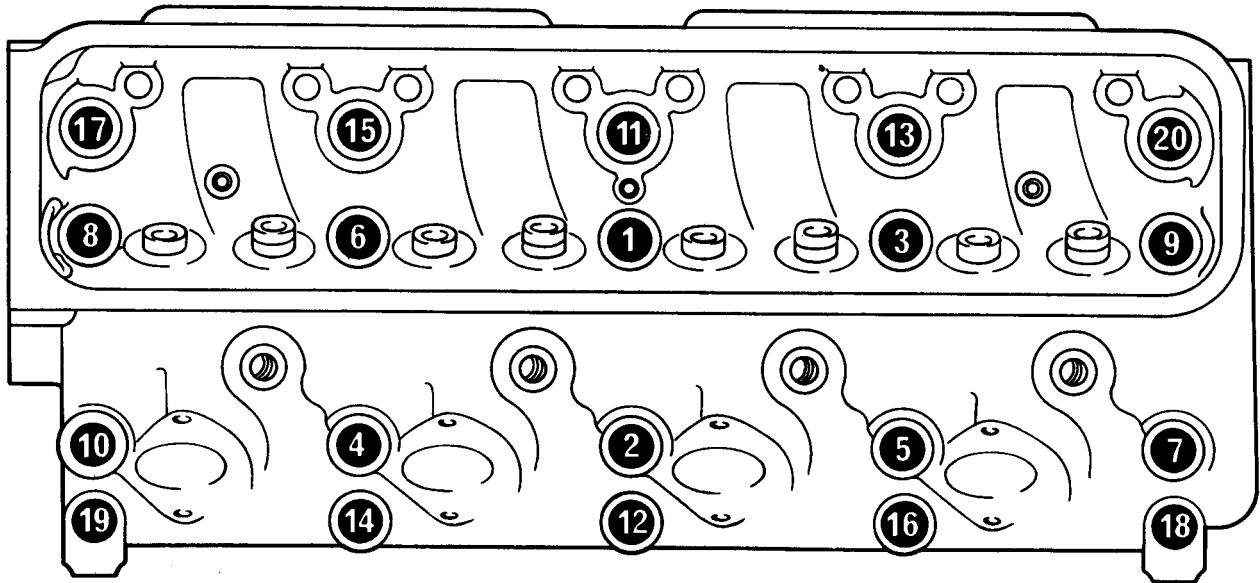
CYLINDER HEAD GASKET (Late Cars)
